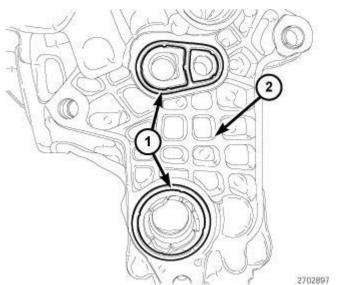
O-Ring Seals & Oil Filter Housing Courtesy of CHRYSLER LLC
